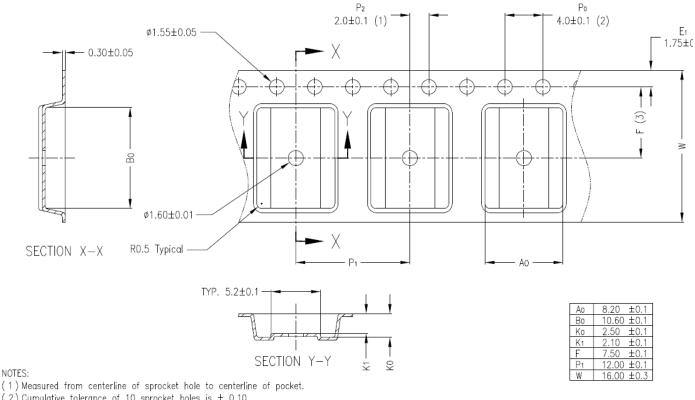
28-Pin SSOP Carrier Tape Drawing
